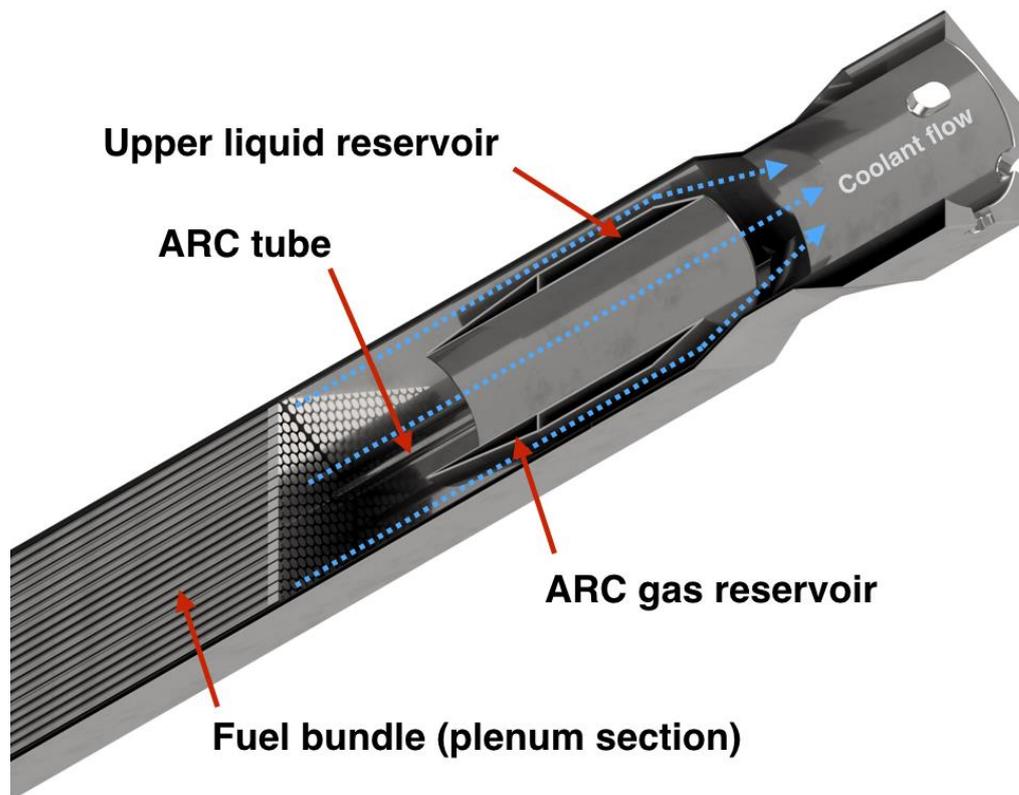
, Top section of the fuel assembly, with components of the ARC system marked
